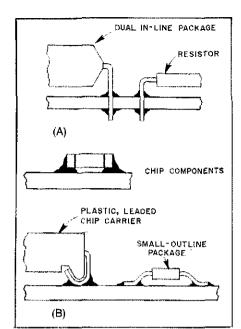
For years, the through-hole mounting of leaded components (A) has been common. Surface-mounting techniques (B) with leadless chip components and miniature IC packages are now being used in volume board assemblies.
